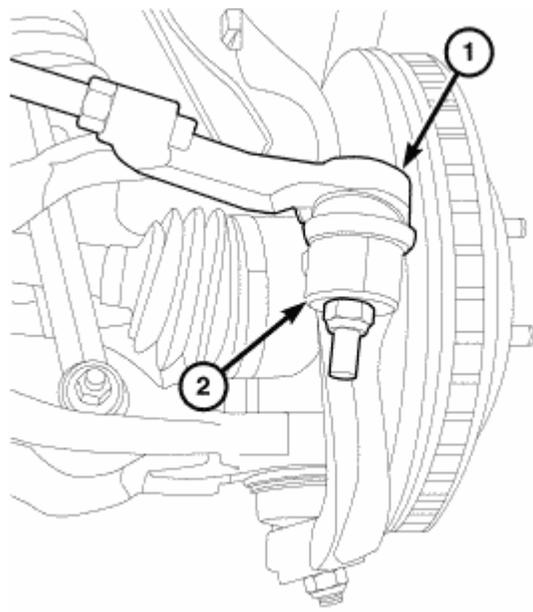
Identifying Tie Rod End & Steering Knuckle
